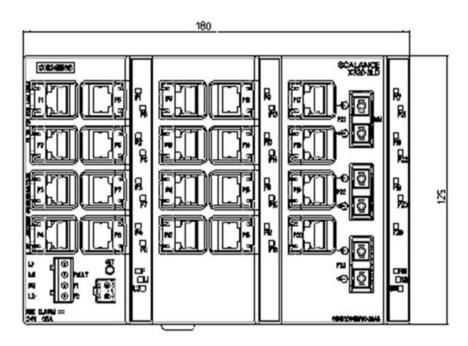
Large design dimension drawing Part 1 (example used here SCALANCE X320-3LD FE)
